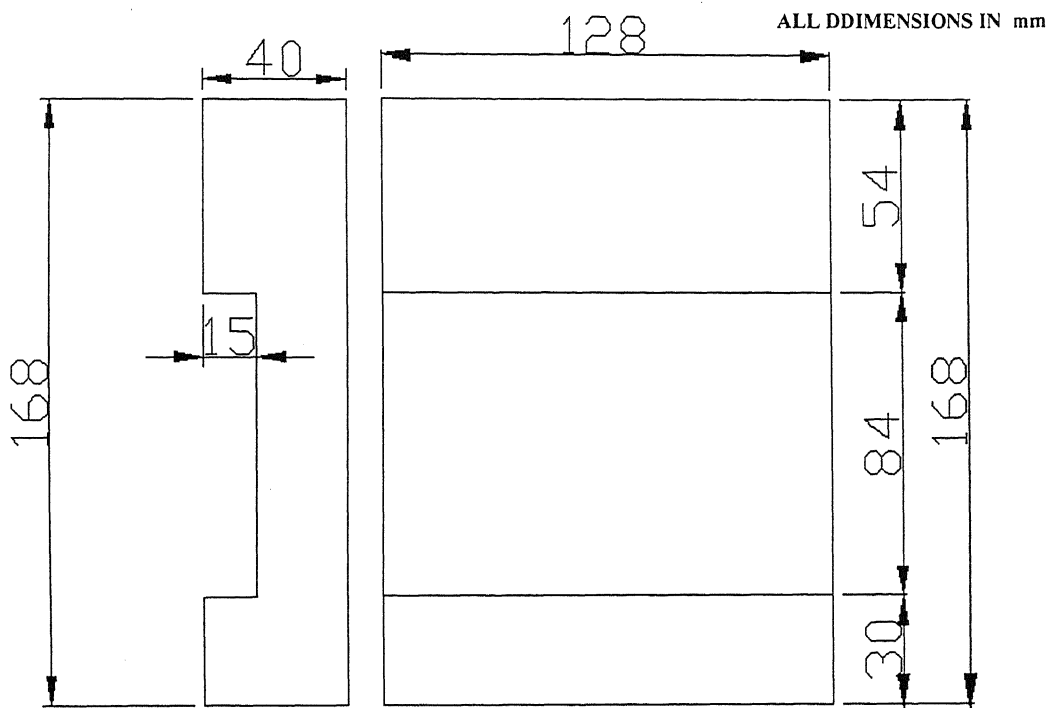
Orthographic view of the device for holding the spindle housing holder
